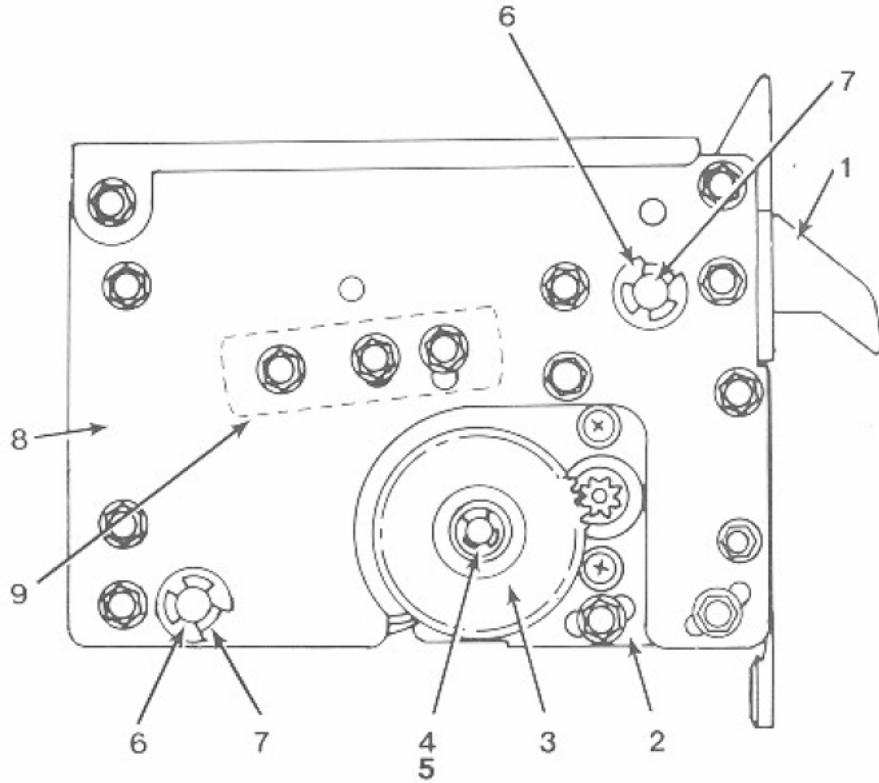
8. OBA-2 Transport Assembly (Sheet 3)
